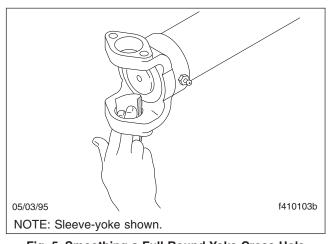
, Smoothing a Full-Round Yoke Cross-Hole
